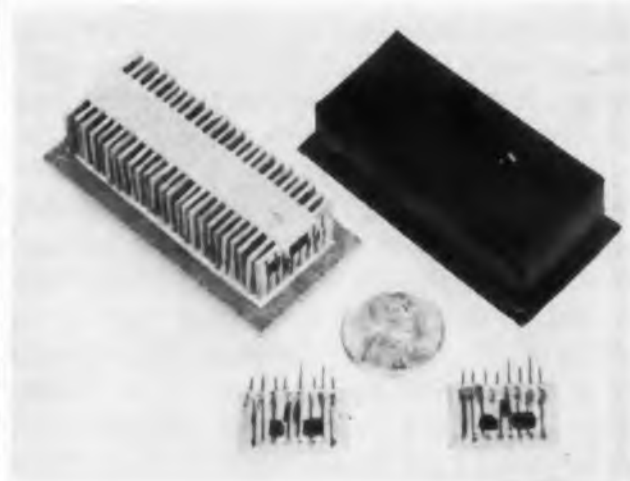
A complete computer module, containing 25 wafers assembled with the Hamilton-Zeiss electron beam welding machine. (Could this package be tagged a "Zeiss cube"?)
